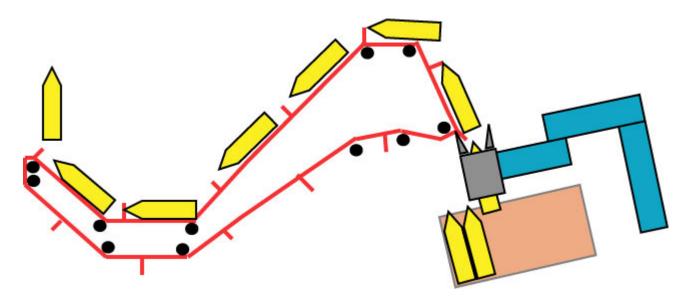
Support Rollers Create a Modified Conveyor Length to Accumulate Products
